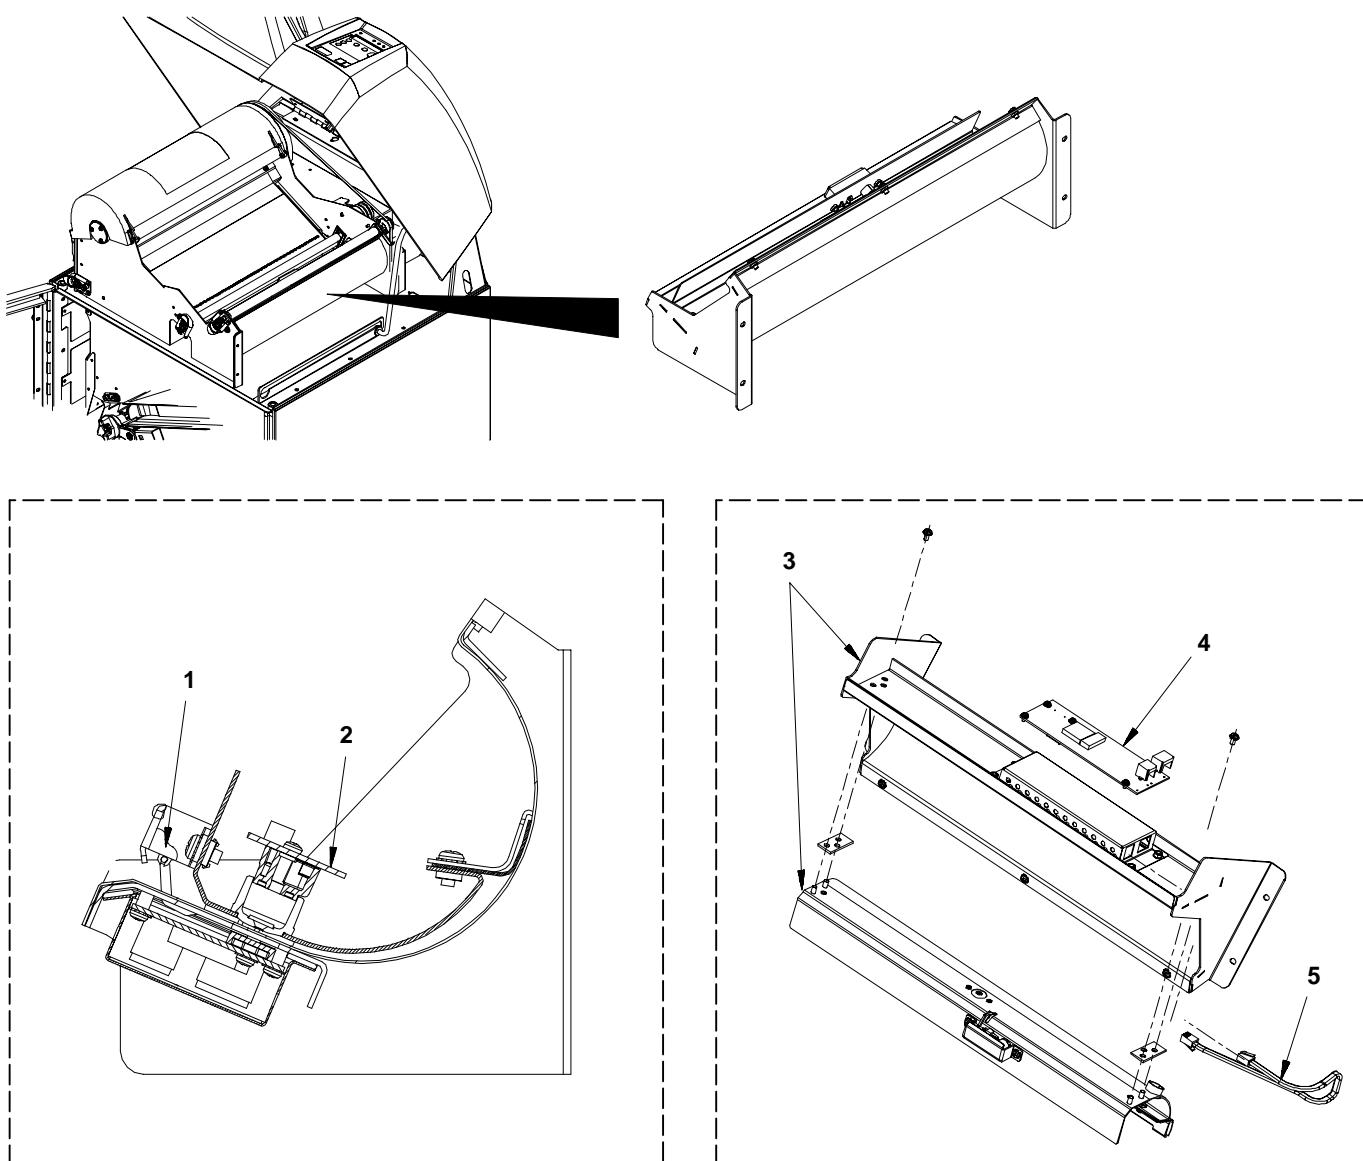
FILM PROCESSOR ASSEMBLY
